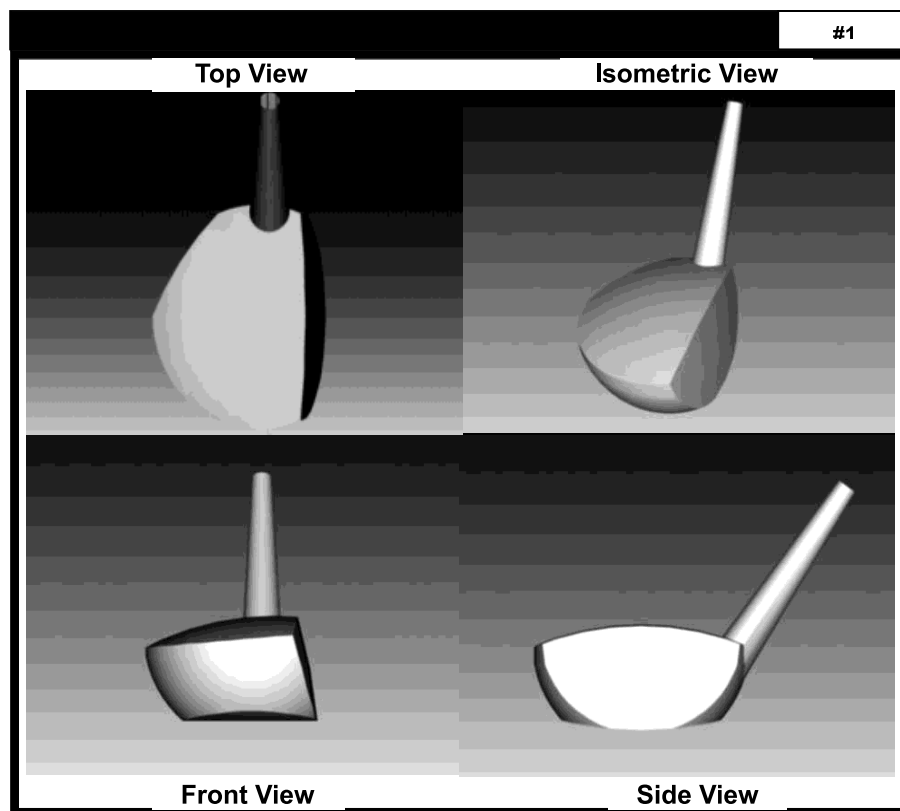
A sample picture for picture sorts (four views of a CAD drawing).
